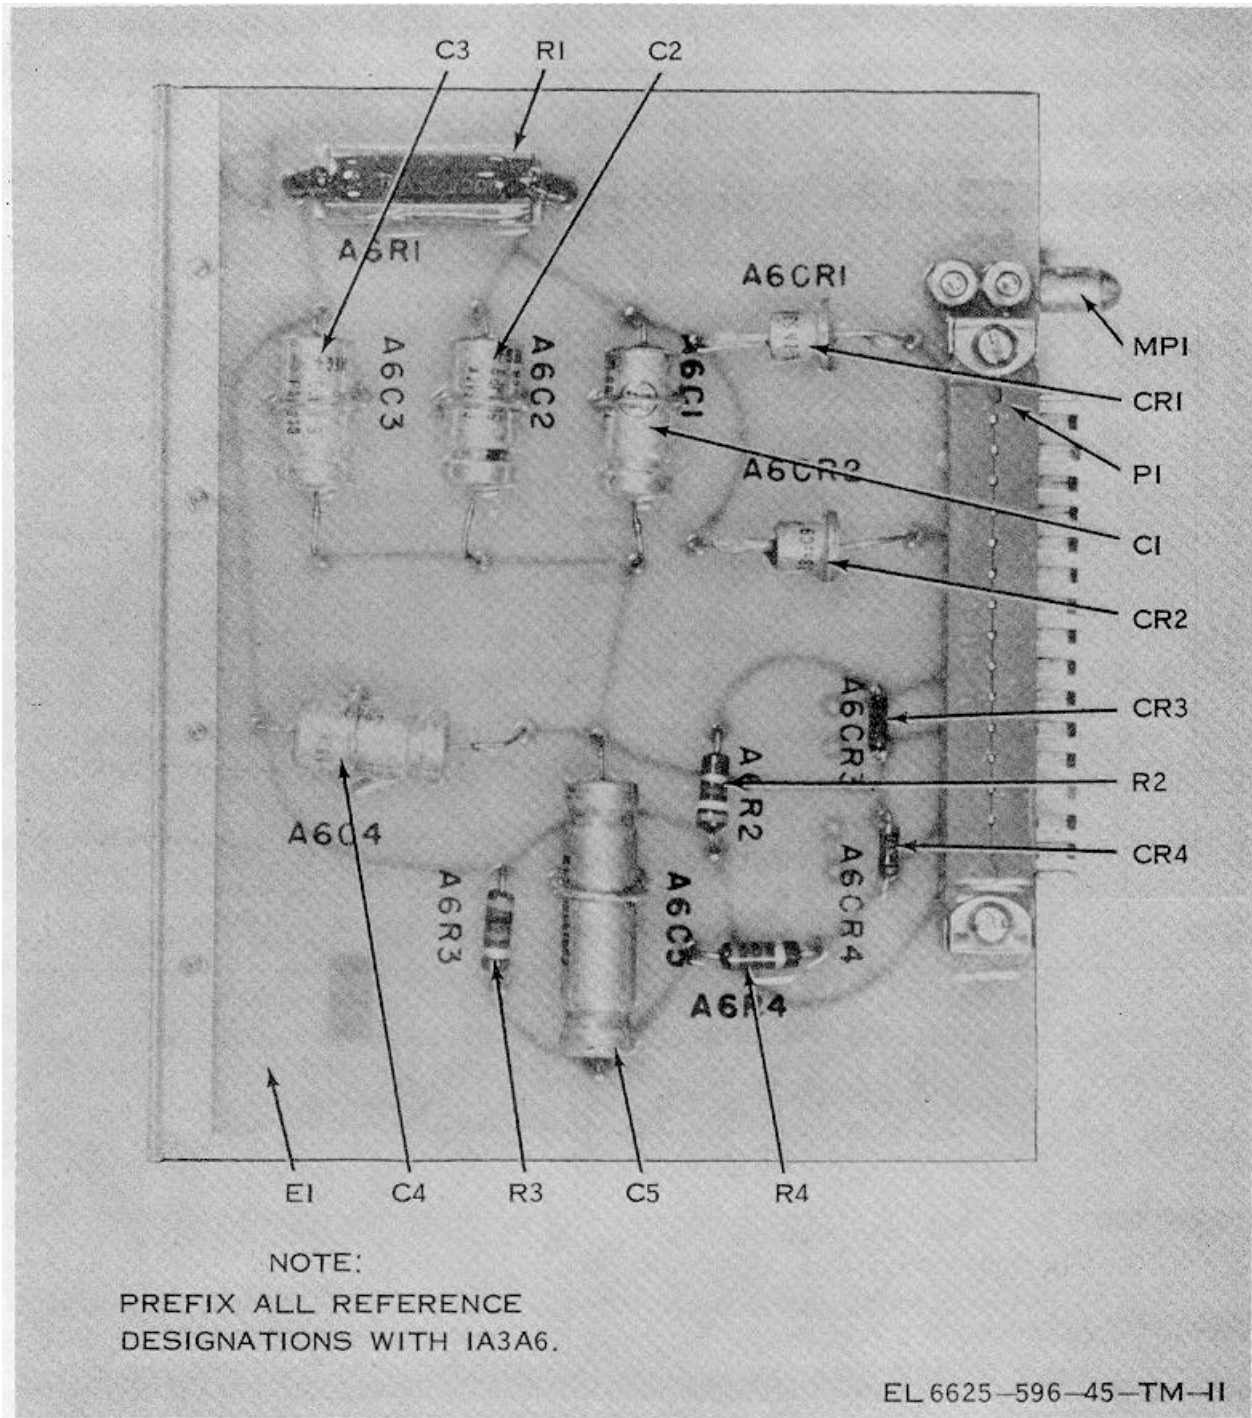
Negative power supply assembly 1A3A6, parts location.
